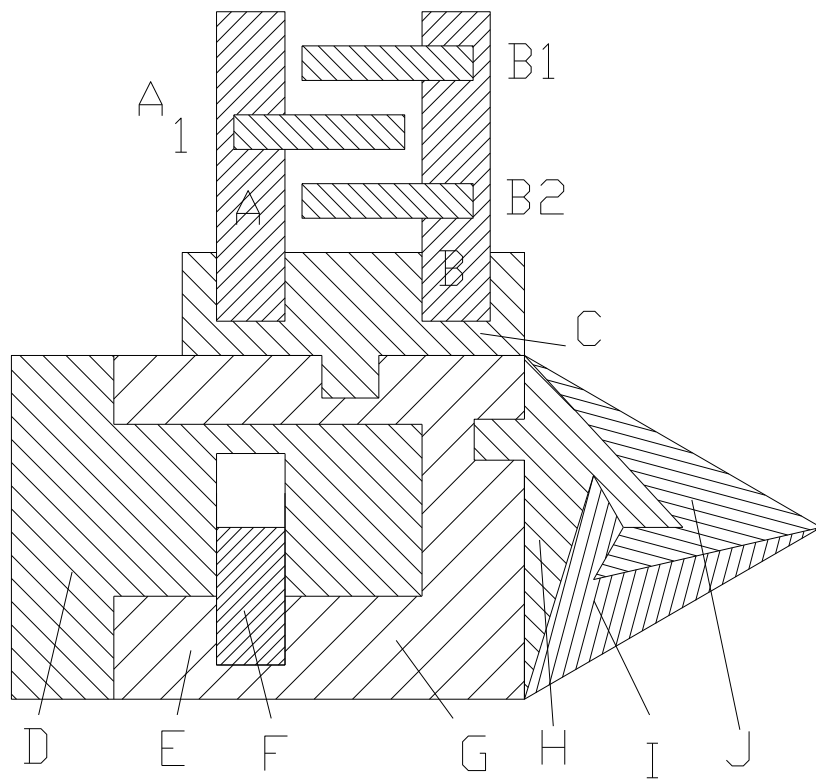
A product that can be assembled with a NC-NS-L-NM assembly
